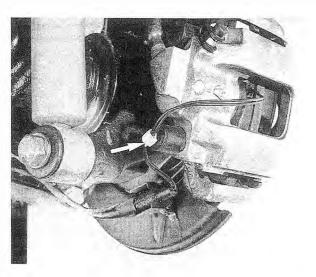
Rear brake pad wear sensor shown correctly routed through clip (arrow).
